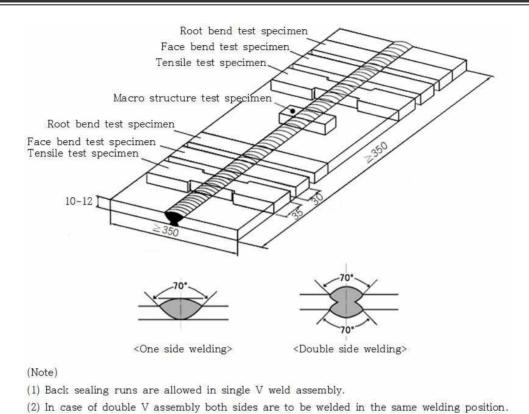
Butt Weld Test Assembly for Aluminium Alloys (A thickness of 10 to 12, unit: mm)
